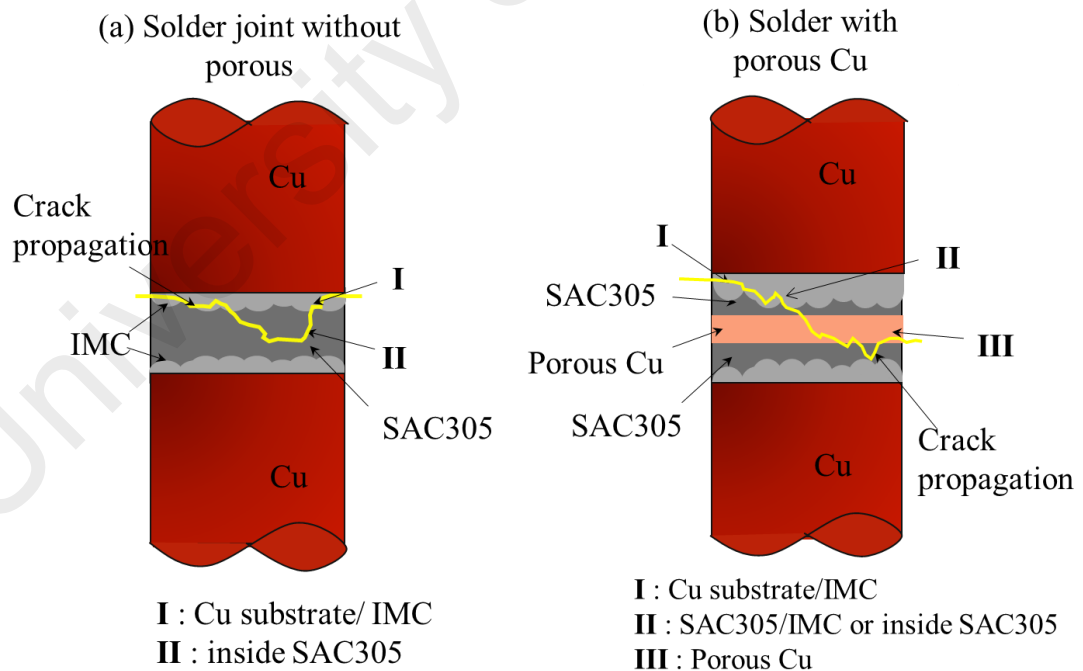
Crack propagation mechanism for the solder joint (a) without porous and (b) with porous Cu interlayer
